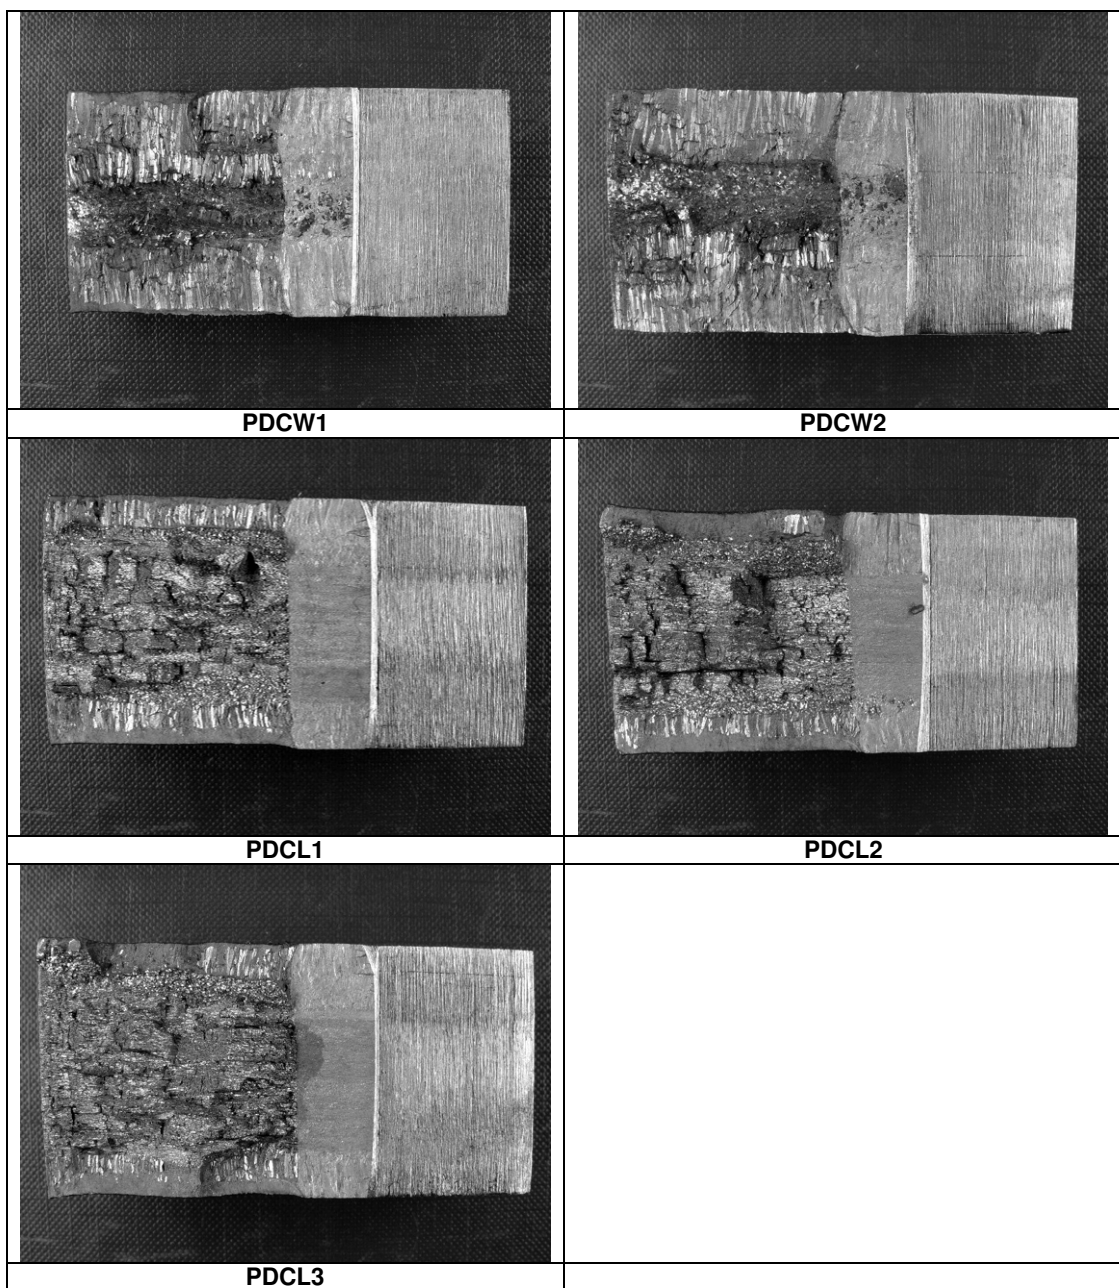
Fractographs of CTOD samples from SAW weld with duplex filler (PD).
